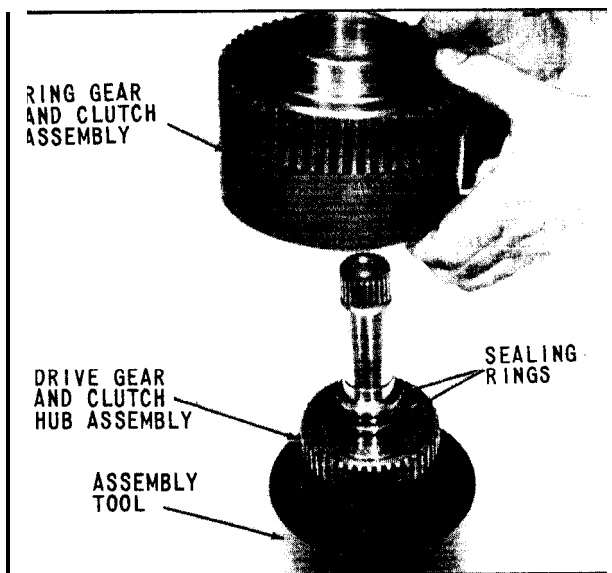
Assembling Ring Gear and Clutch Assembly on Drive Gear
